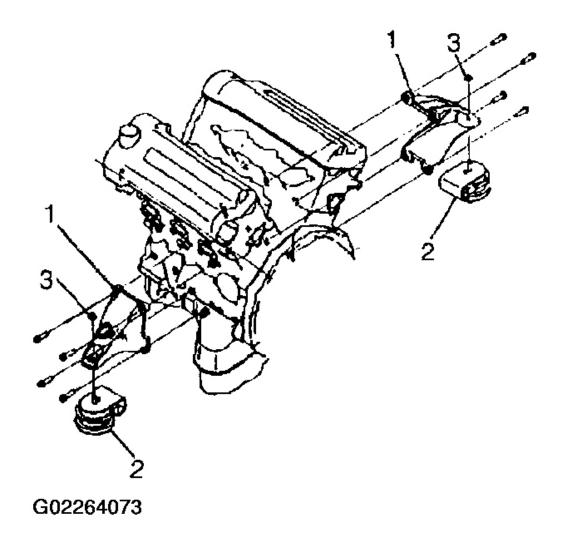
Disconnecting Engine Side Mounting Brackets Courtesy of SUZUKI OF AMERICA CORP.
